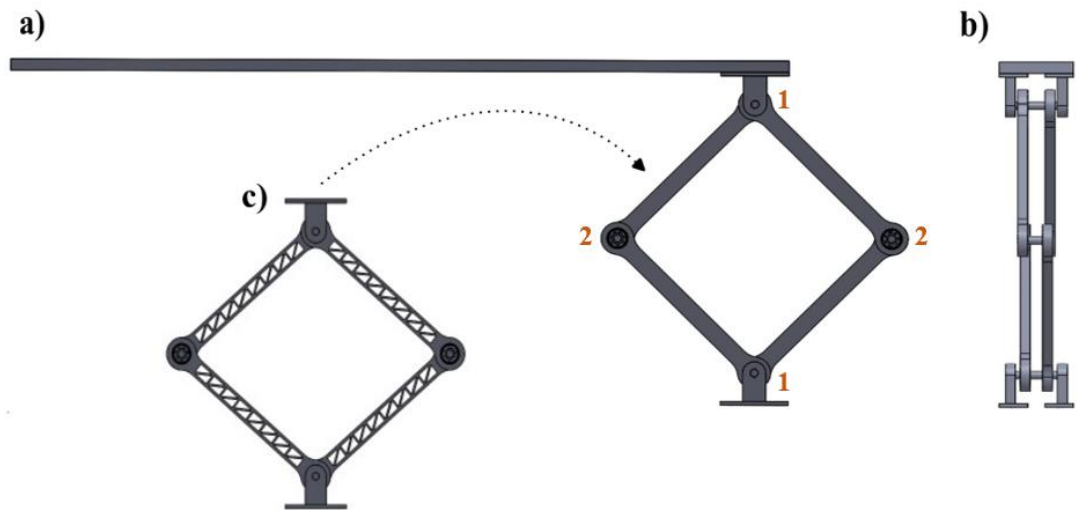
a) A front view CAD assembly model of the single-stage IA attached to a cantilever beam. b) A side view CAD assembly model of the single-stage IA. c) A front view CAD assembly model of the single-stage truss IA.
